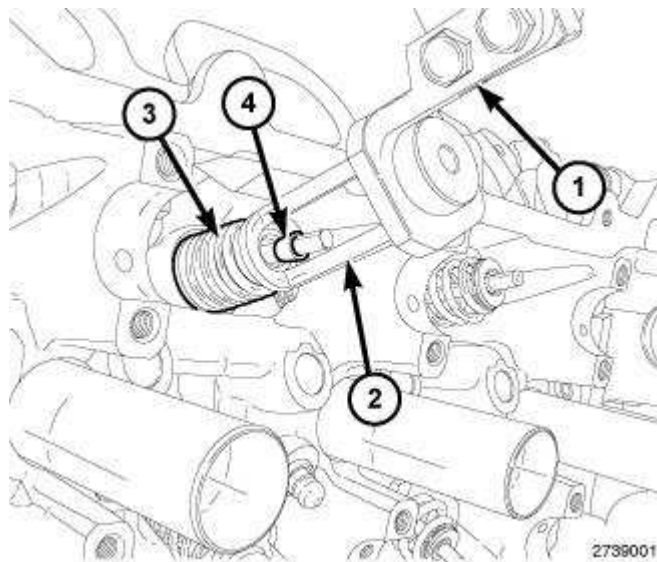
Compressing Valve Spring & Locating Valve Retaining Locks
